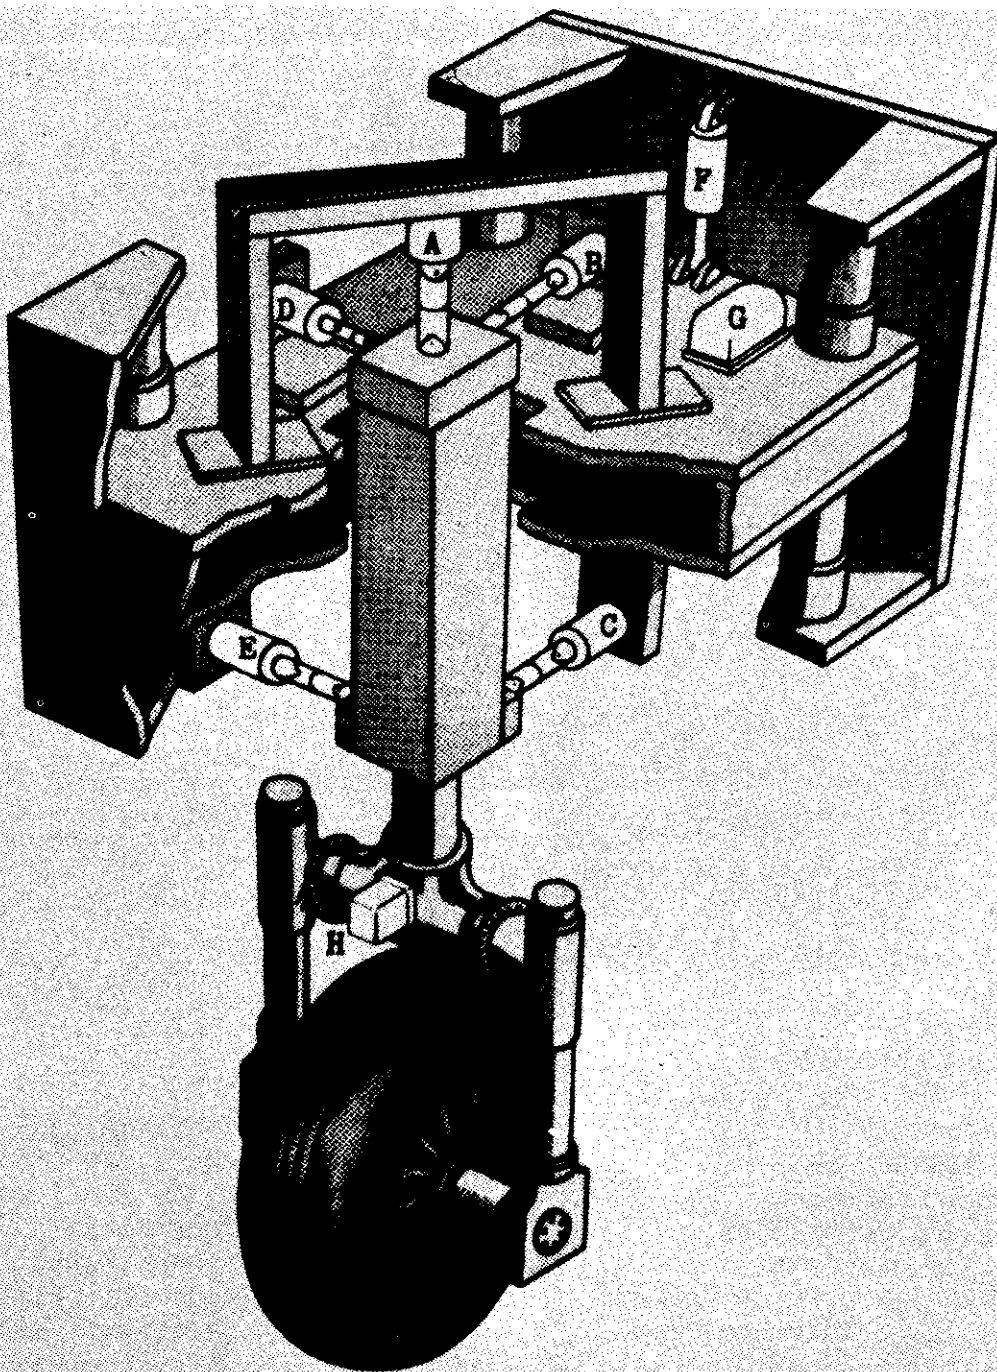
Lower Portion of Bomb Bay Fixture Showing Test Wheel and Strut
